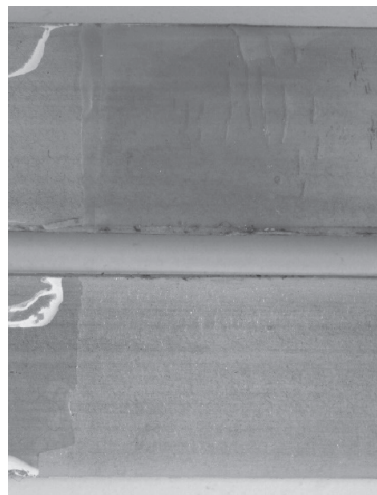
Fracture surfaces from precrack edge to pin loading zone of a representative ENF specimen.
